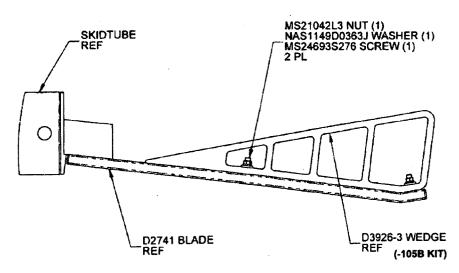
D350-636-105A/-105B WEDGE KIT INSTALLATION
